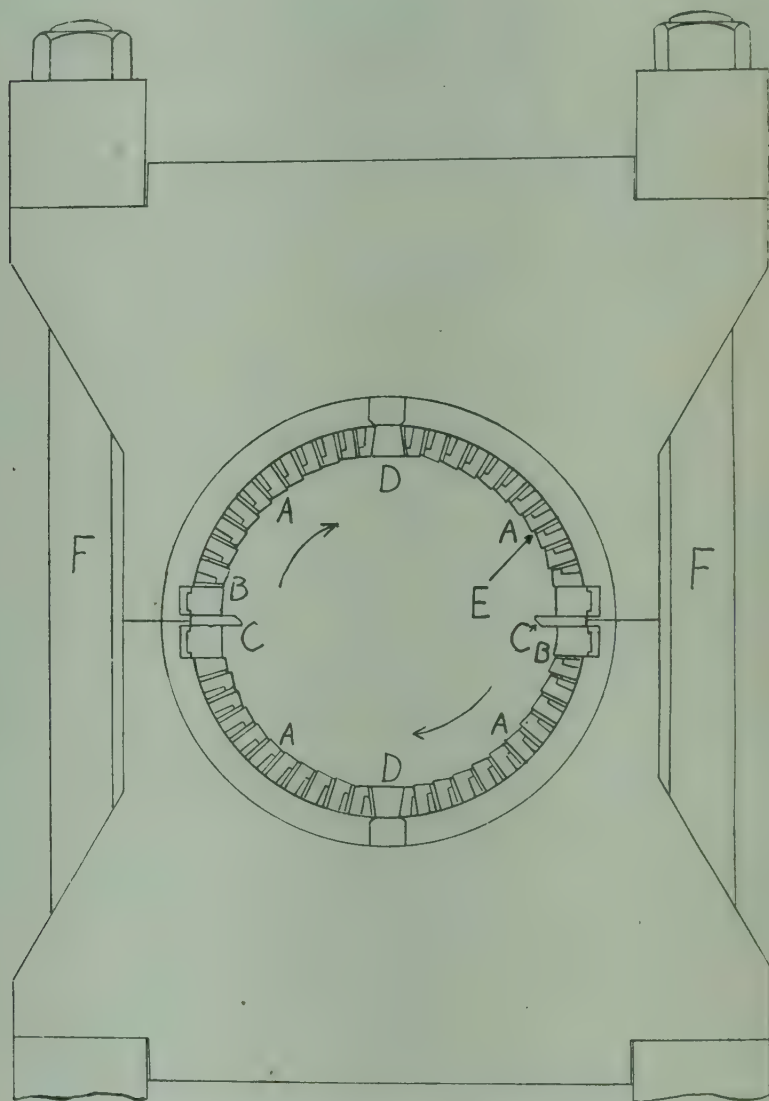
END ELEVATION MAIN CAGE ASSEMBLY
